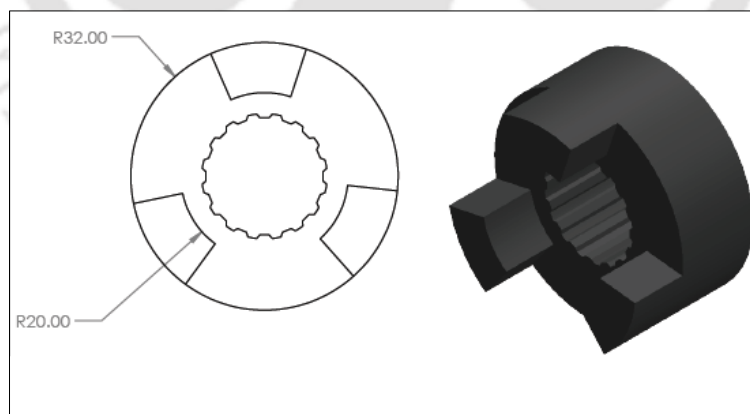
CAD diagram for the electric motor Cardan shaft (adaptor).
